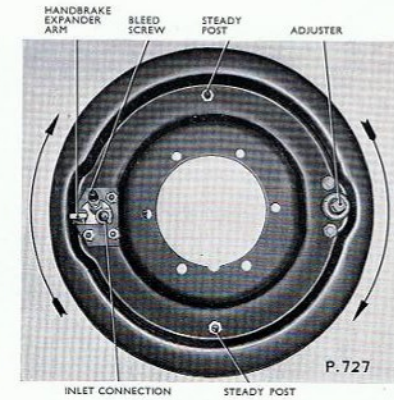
Rear view of the KAH.30 and KAD.30 left hand (nearside) rear brake assembly. Arrows indicate the direction of drum rotation.
